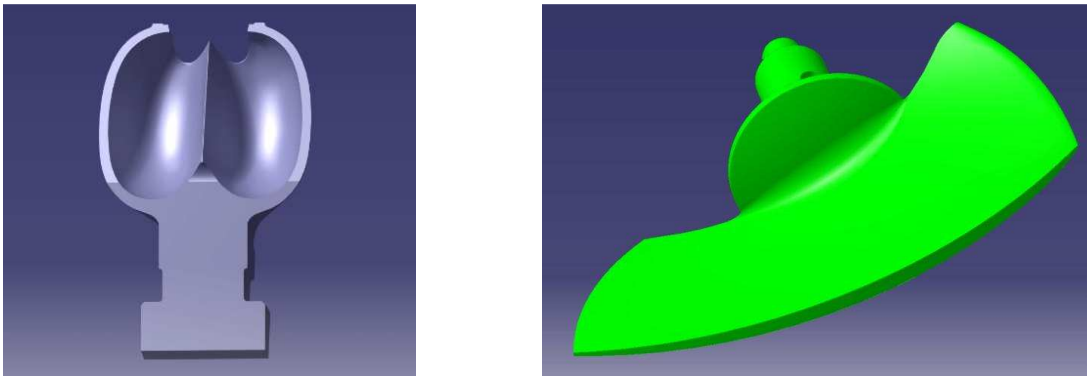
Example of 3D files of the hydraulic profile of a bucket (on the left hand side) and of a blade (on the right hand side) that can be used by the manufacturers for CNC machining (© Mhylab)
